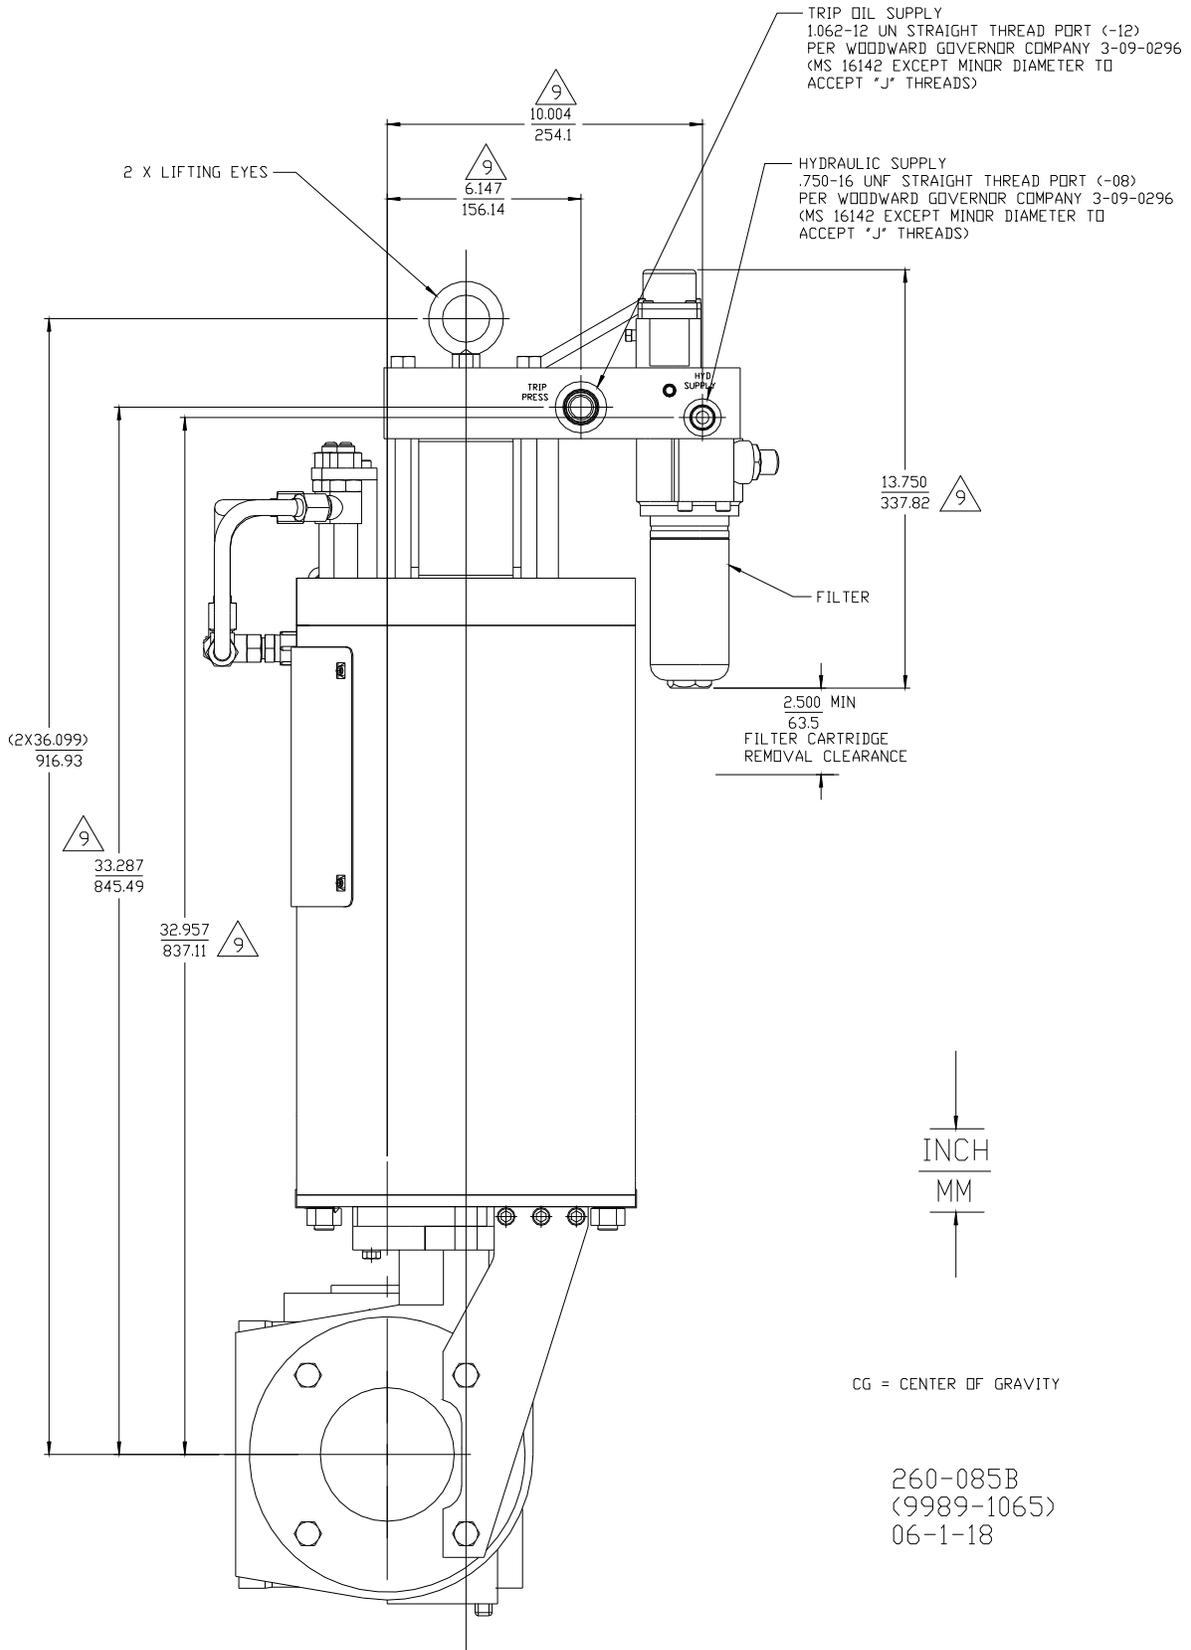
Gas Stop/Ratio Valve Outline Drawing (6-inch, with 3 LVDTs, SS-260)
